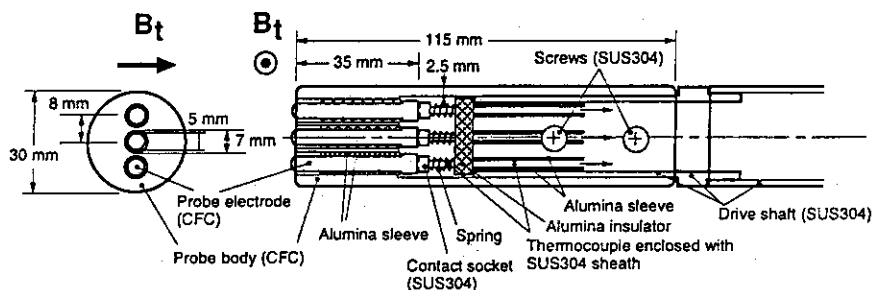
Probe head assembly viewed from the front (left), and cross-sectional view (right).
